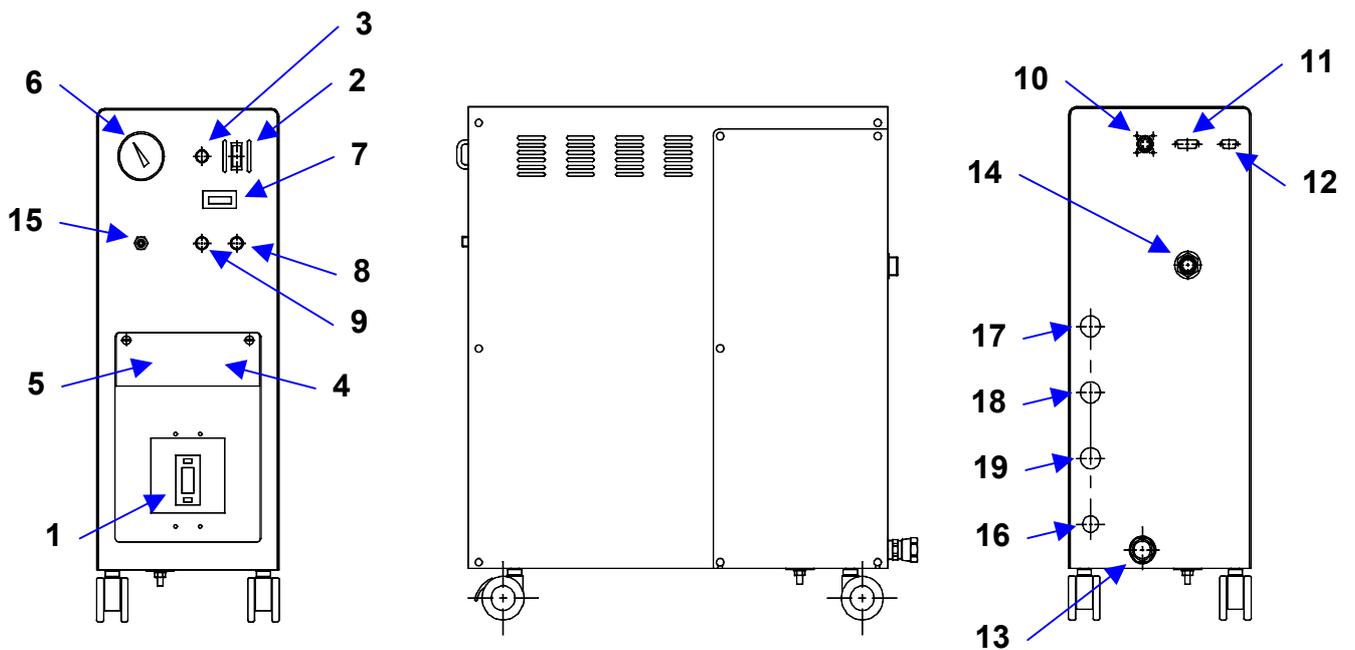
EXTERIOR PARTS FOR CNA-61D-E
